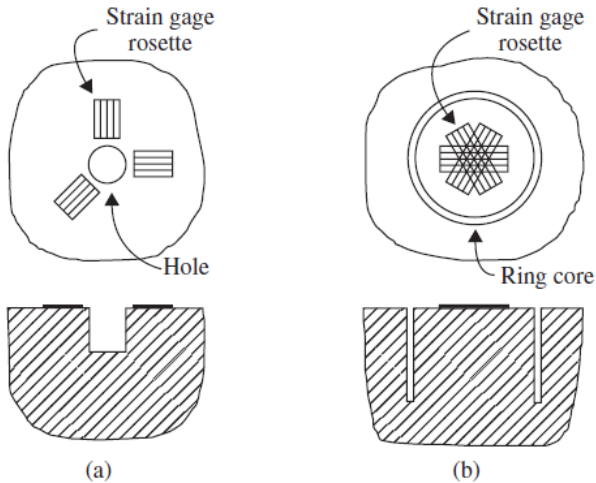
Main semi-destructive techniques: (a) Hole-Drilling Method and (b) Ring-Core technique [8].
